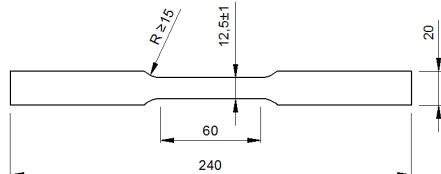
Uniaxial tensile specimen geometry and dimensions (mm)
